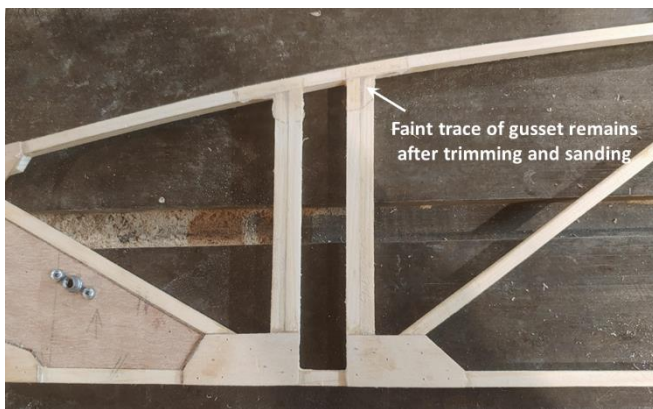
shows the fixture, rib, and clamp in real life and Figure 4 shows the fixture in use with the router in place. Before starting to cut, I moved the router over the rib structure away from any gusset and with power off, plunged so that the cutter just touched the structure. Then I locked the depth. Don't put any pressure on the rib structure while doing this or you'll cut too deep and gouge the structure. I then made a tiny test cut on the gusset I'm removing to check the adjustment. From this point, I made small differential adjustments to the cutting depth with the router's depth gauge. After a successful cut, almost the entire gusset is gone, with only a thin transparent film of epoxy and stray wood fiber remaining. I removed this residue with a Perma-Grit sanding block, resulting in the gusset-free structure in Figure 5.
